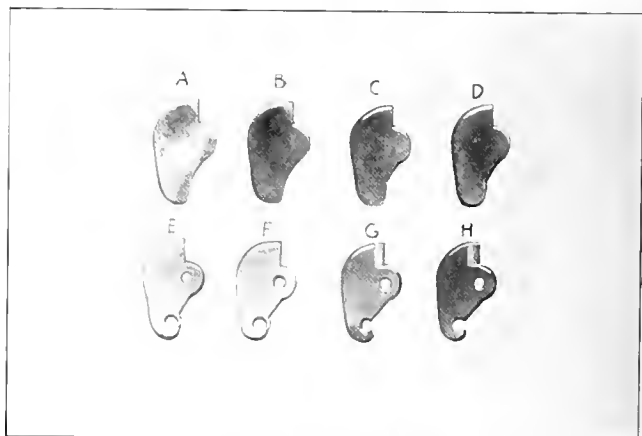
Eight Steps in Making a Moving Cutter Blade
